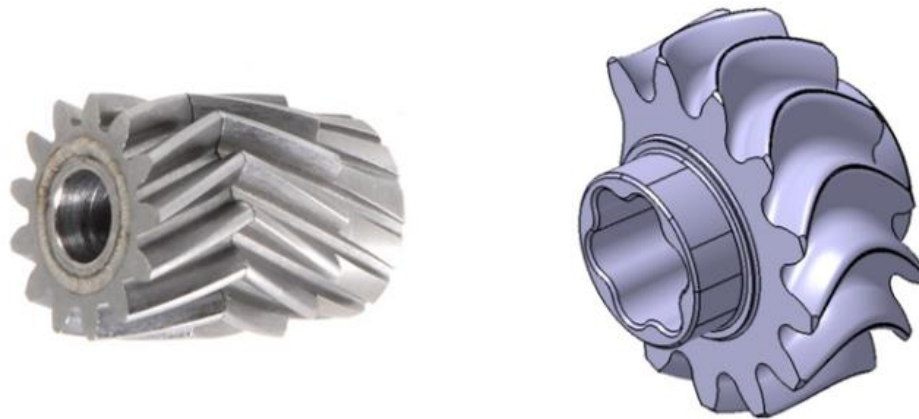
Herringbone pinion gear (left) and similar profile steering pinion of SC18 & SC19
